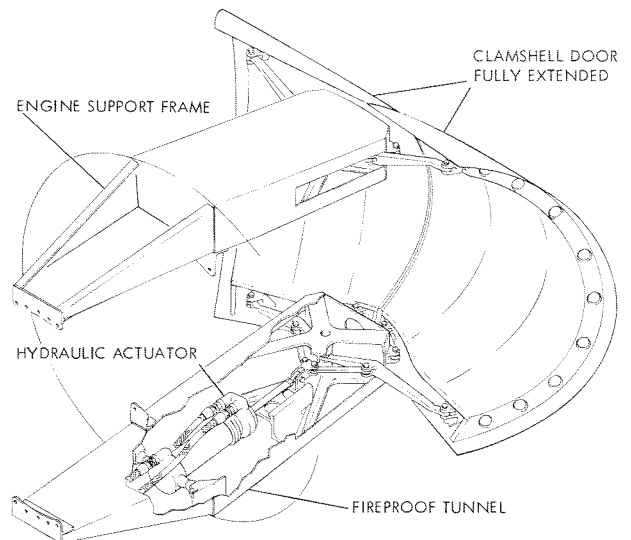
THRUST REVERSER ARRANGEMENT.
